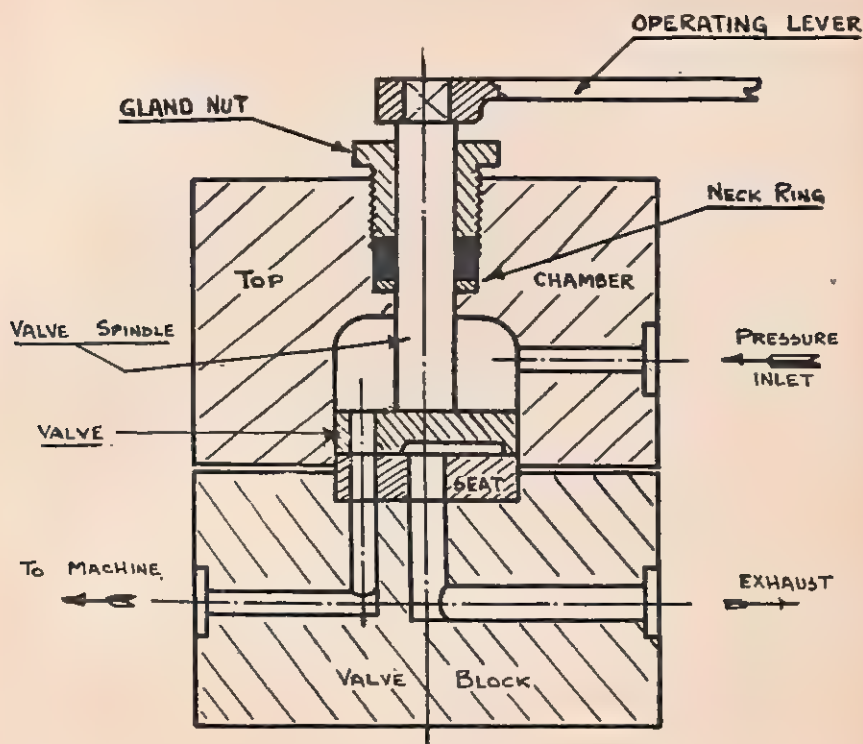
Sectional Illustration of Rotary Face or Disc Valve.
